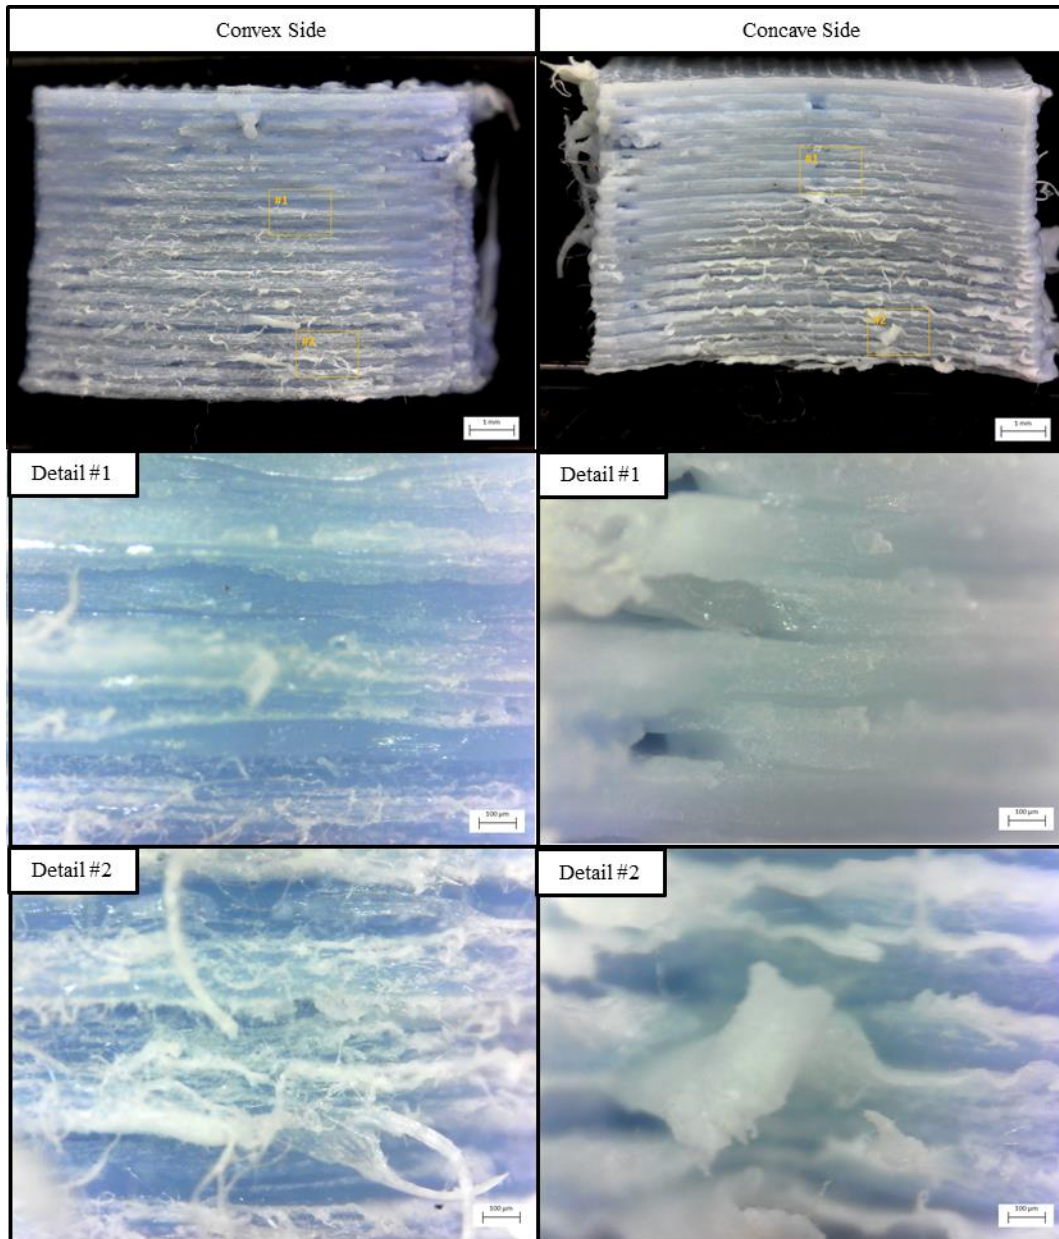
Fracture surfaces of IBS specimen 1 for interface between compositions 50% and 25%.
